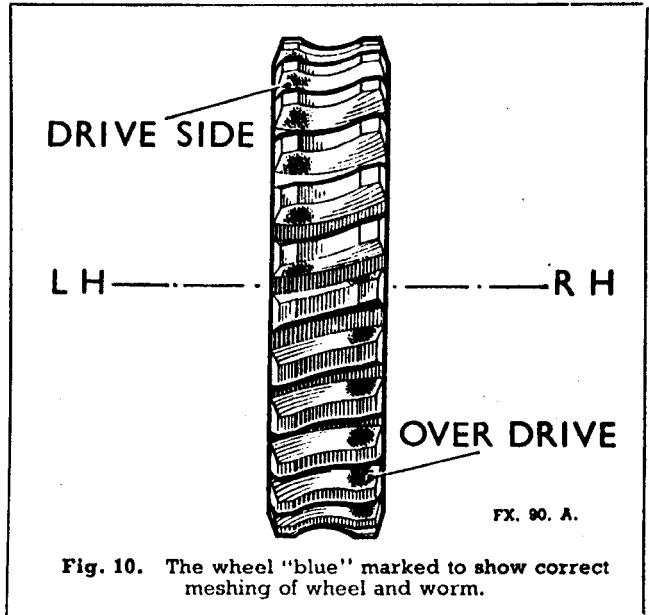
The wheel "blue" marked to show correct meshing of wheel and worm.
